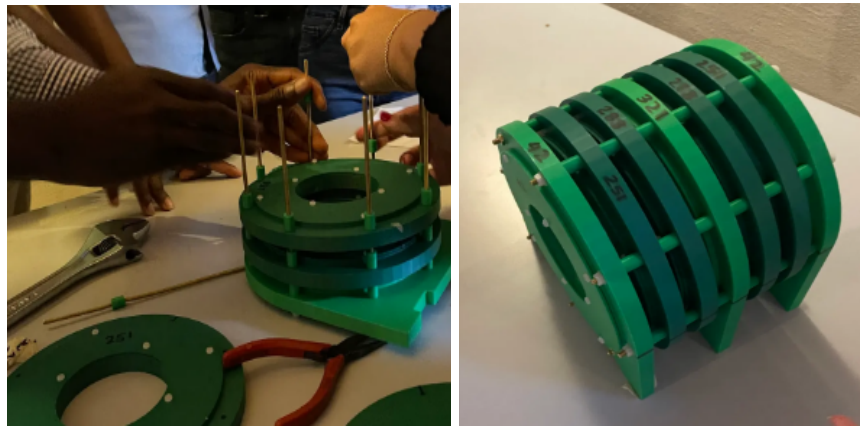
Showing the ring assembly process and the result of the Halbach array magnet after assembly.
